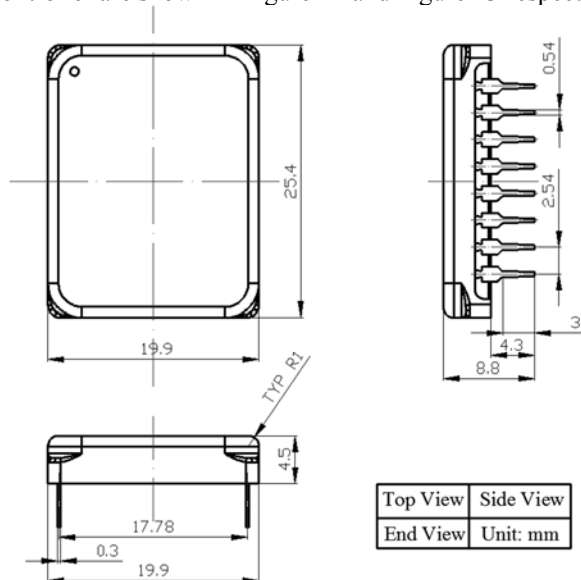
Dimensions of the DIP Package Controller of TECA1-xV-xV-D
